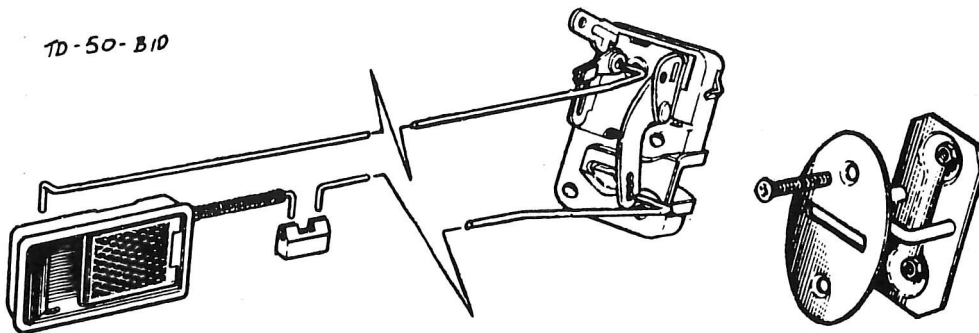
FLUSH TYPE REMOTE CONTROL, DOOR LOCK, & STRIKER.
